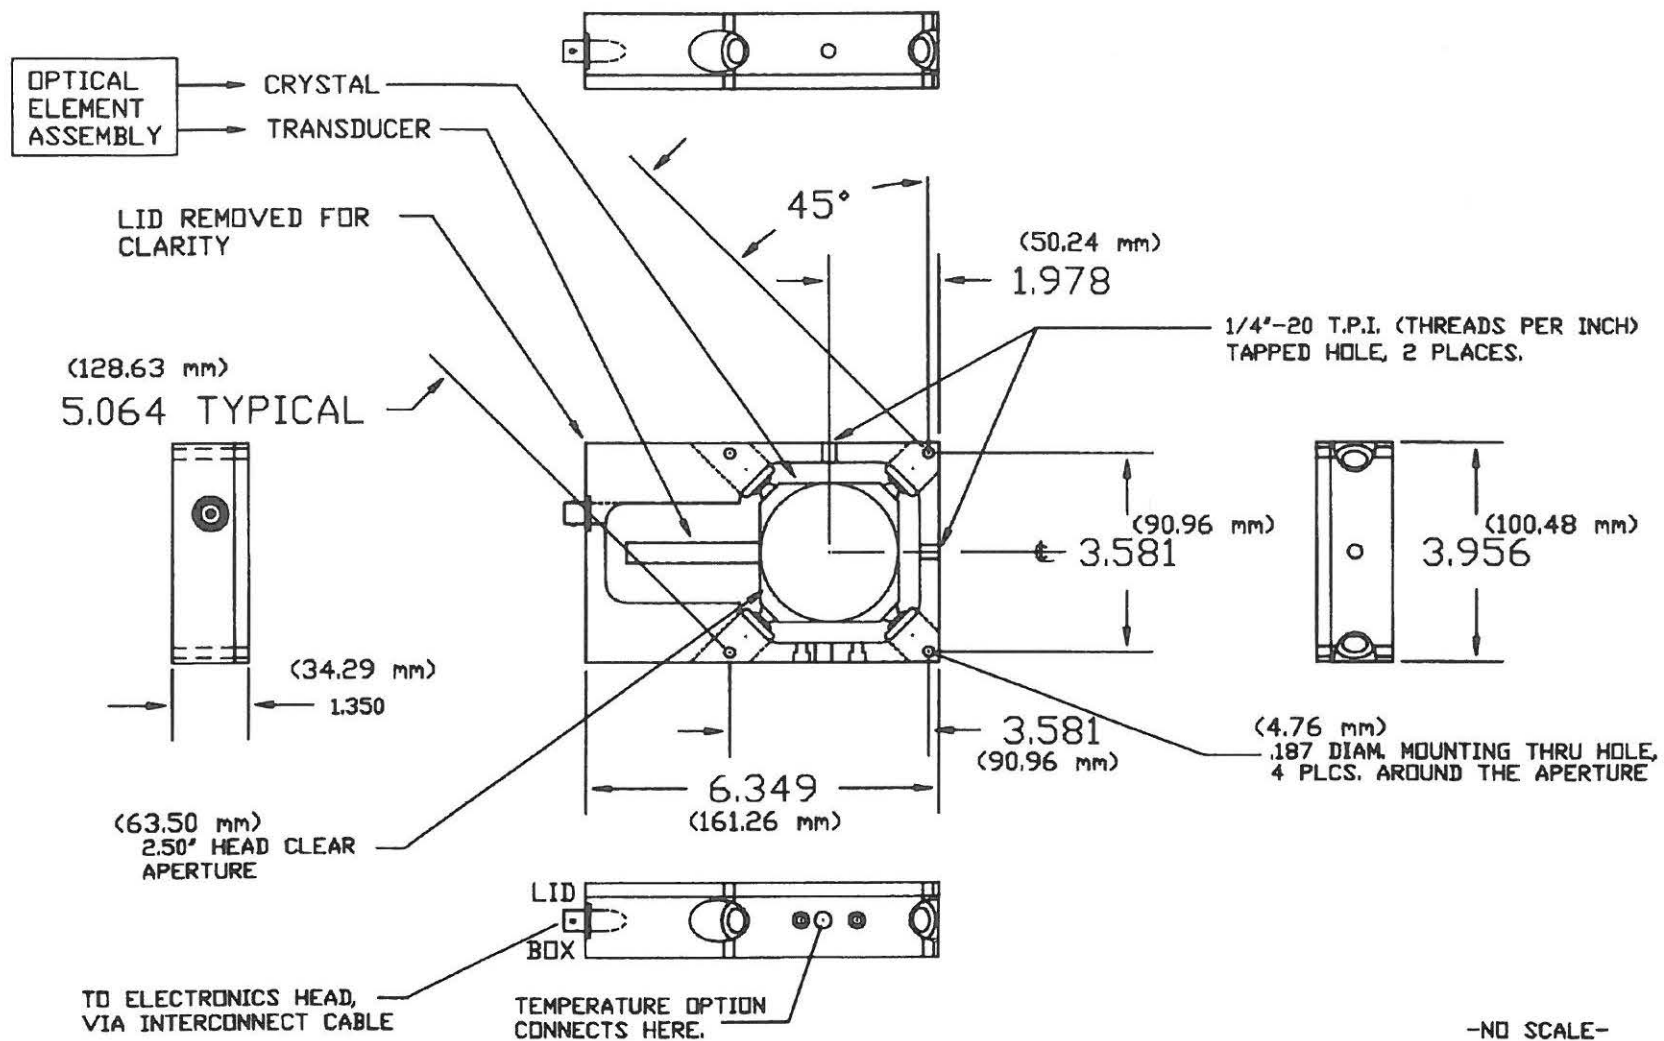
Model II/FS42 Optical Head Dimensions.
